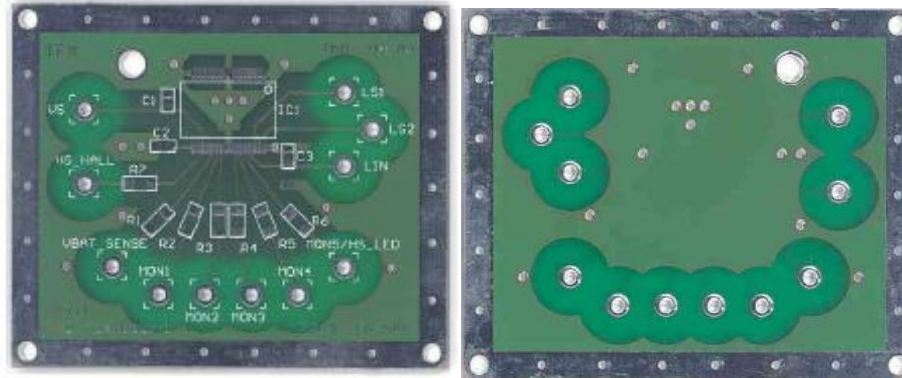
Example of system level ESD test board with soldered IC in top- and bottom layer view
